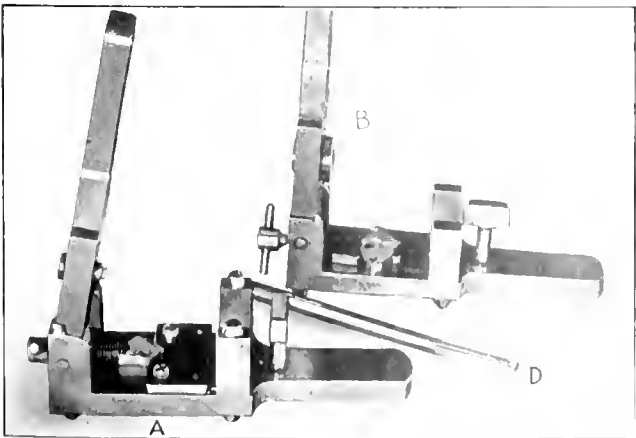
Drilling and Reaming Jigs for the Fixed Blades
